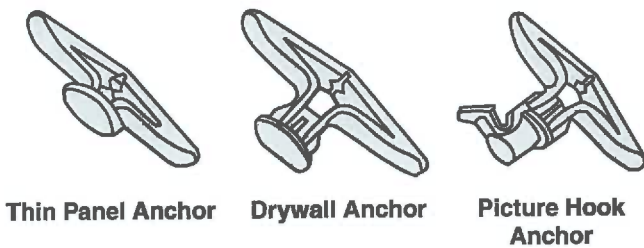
One piece anchors include the anchor and fastener in one assembly. (*The Rawlplug Co.*)
